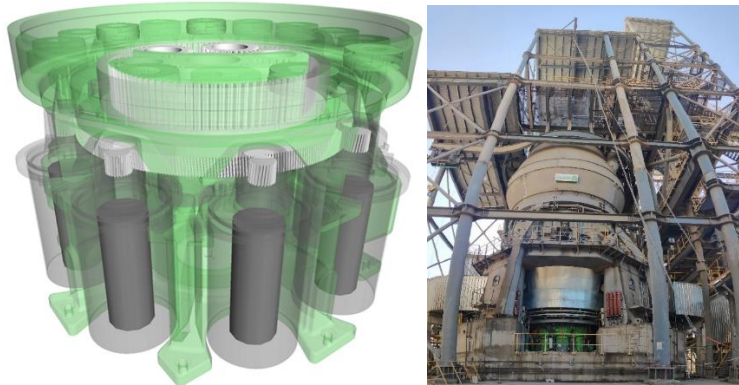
KPBV mill gearbox with bevel gear and planetary gear set
